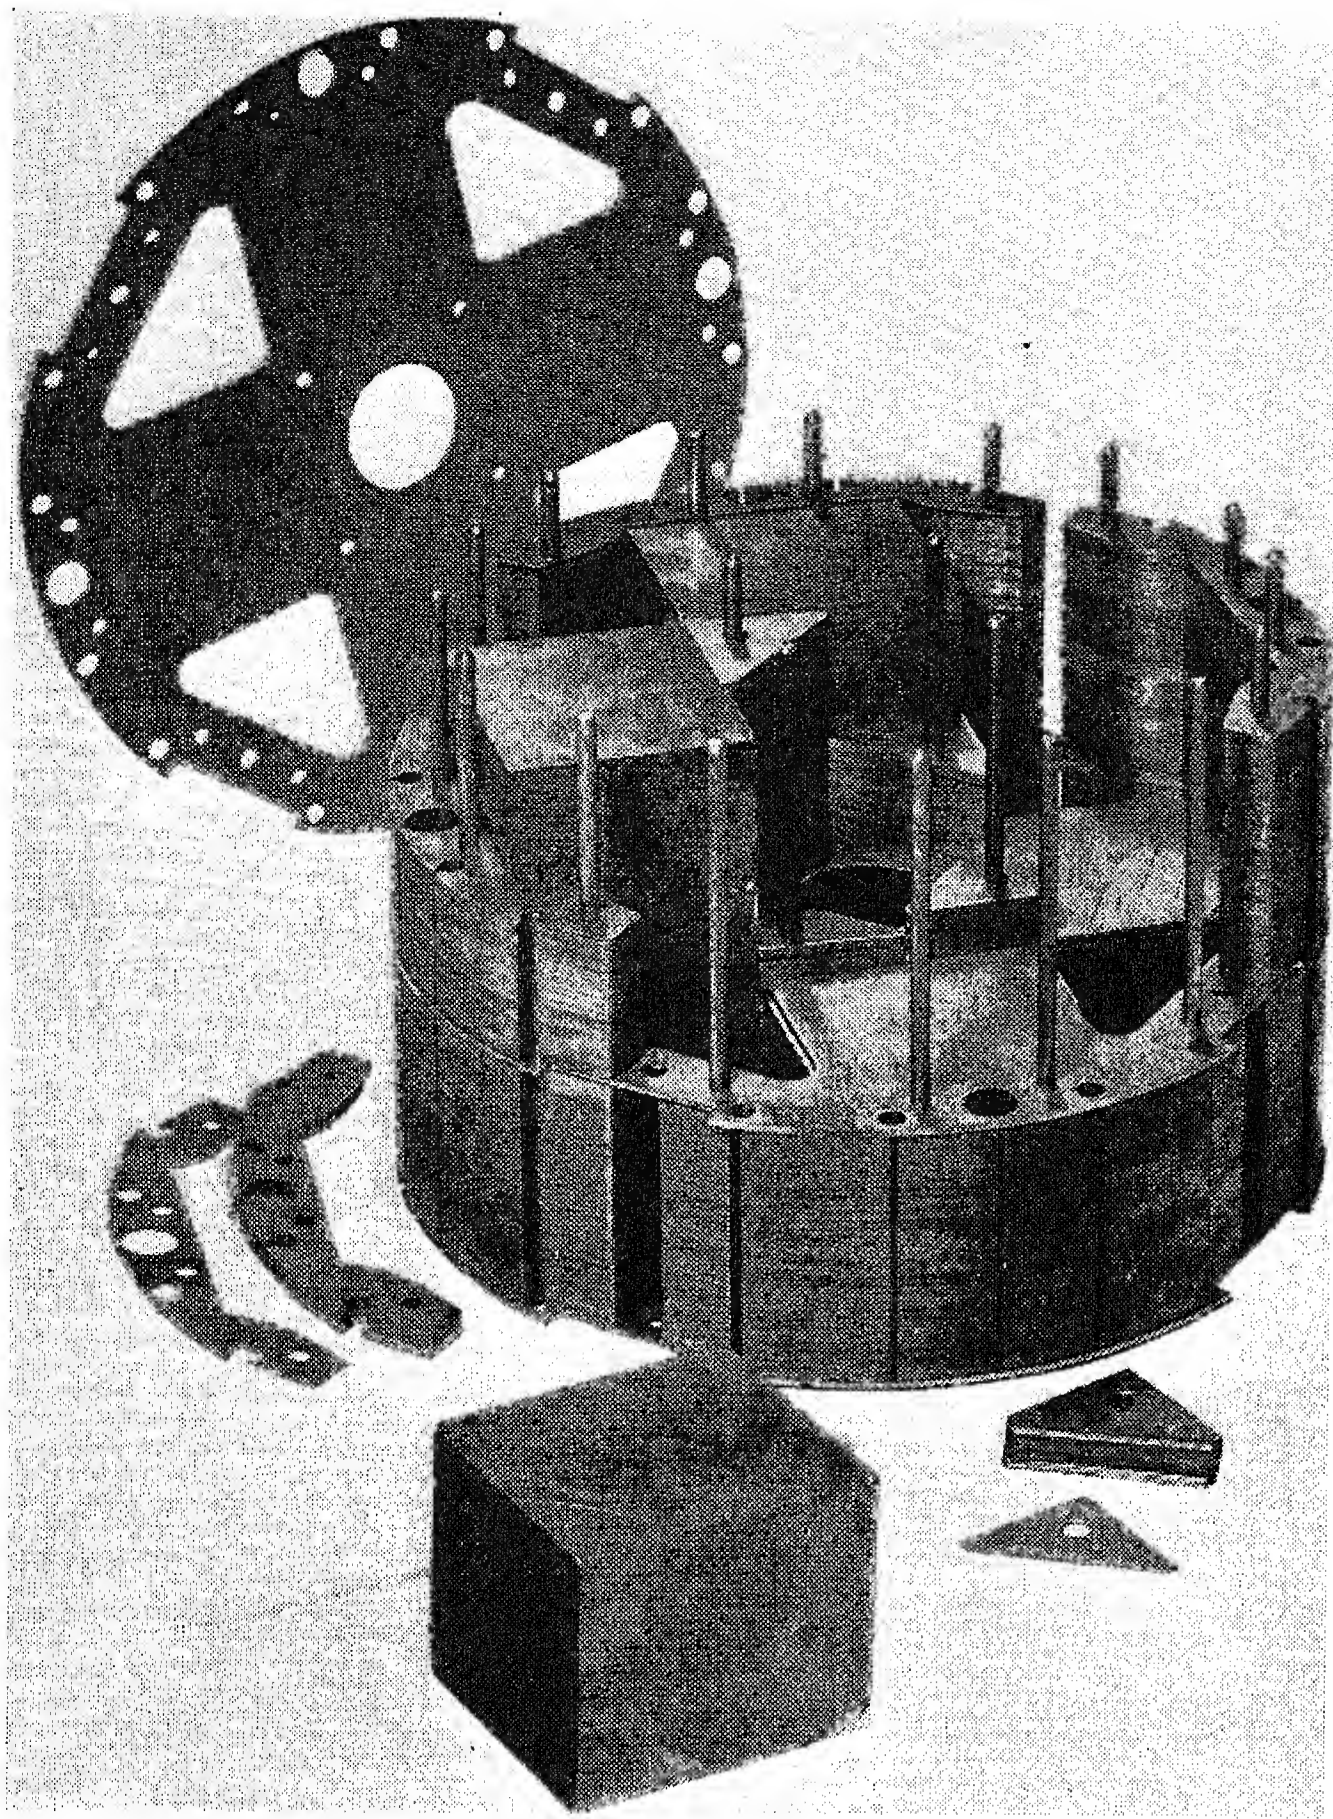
(left). 6.3-kva 4-pole 60-cycle rotor magnet assembly, partially stacked, showing special high-leakage extension to the pole tips and the loosely supported inner magnet ties. The main shaft is installed in this assembly after casting, see Figure 6
